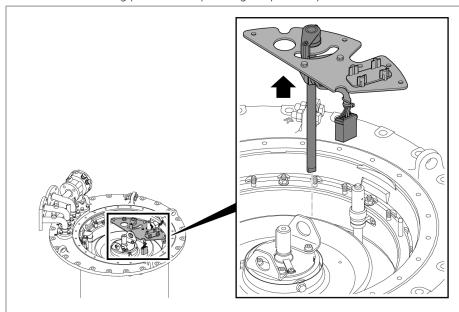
Mounting plate with tap-change supervisory device and drive shaft
